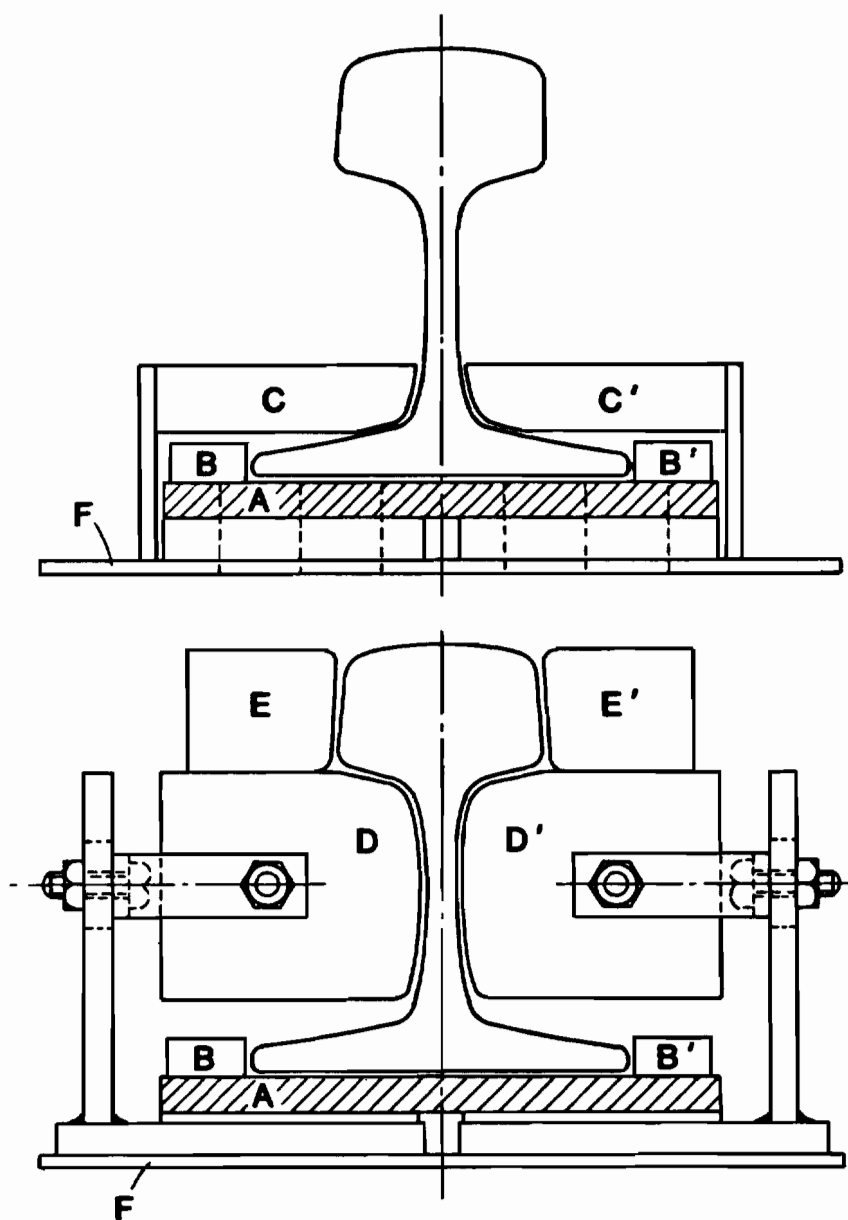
ENCLOSED ARC WELDING ENCLOSURE BLOCK ASSEMBLY.
